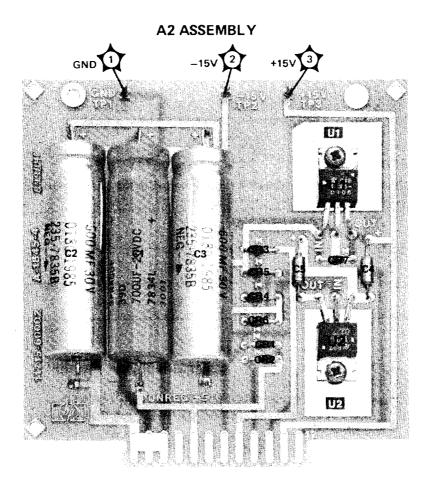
A2 Power Supply Assembly Component and Test Point Locations (P/O Errata)
